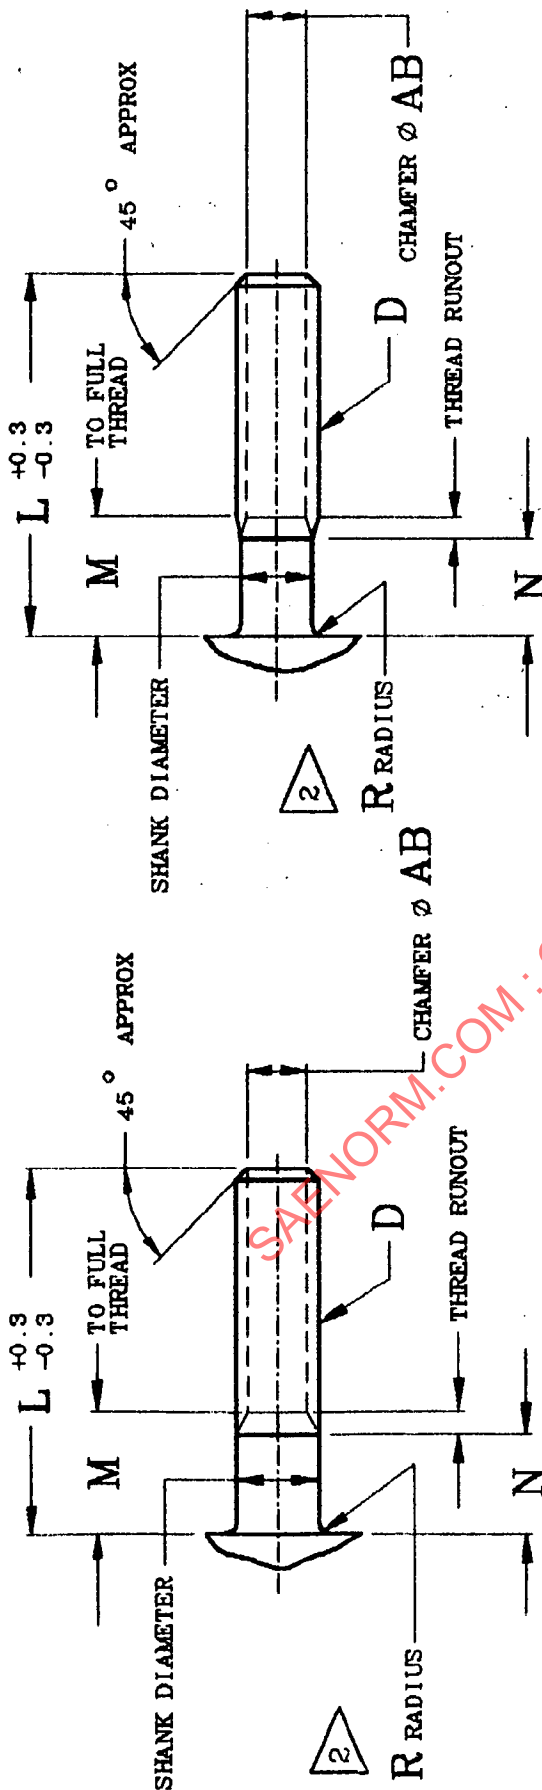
A - COARSE TOLERANCE-FULL SHANK
